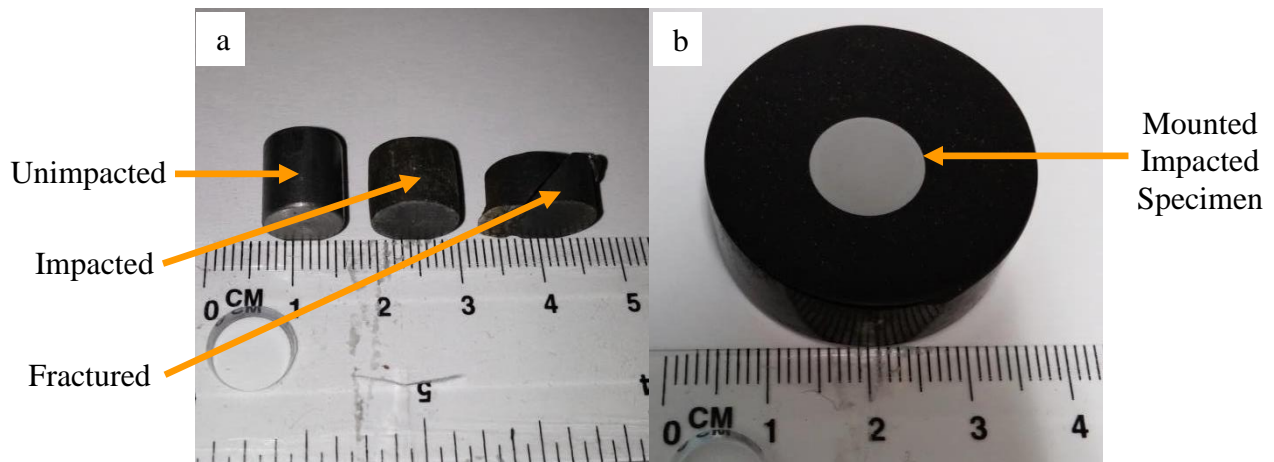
4: (a) Image of an untested, impacted, and fractured specimens (b) Image of a mounted specimen after etching.
